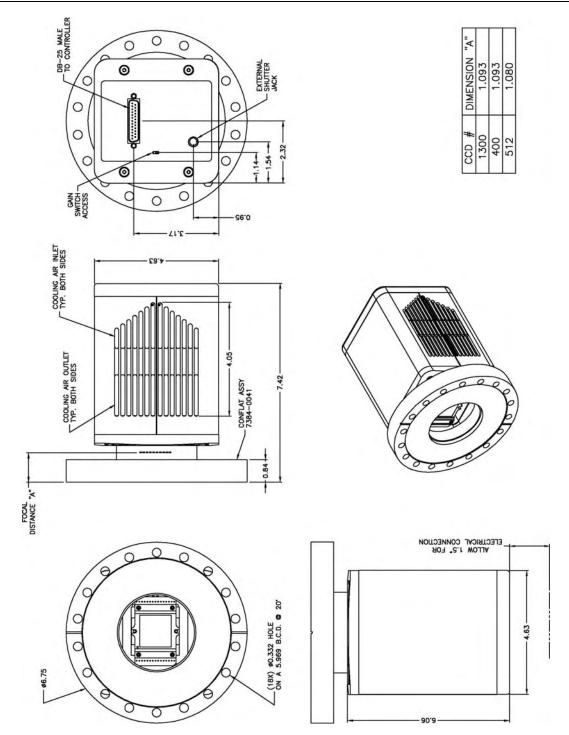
PI-SX TE-Cooled Camera (6.75" ConFlat Flange)
